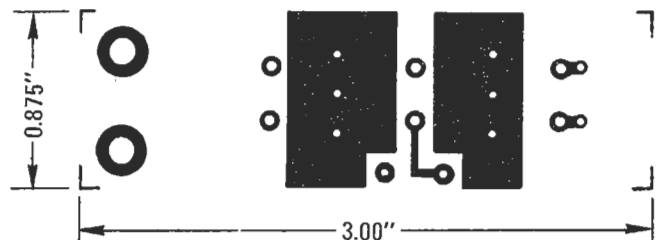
FOIL PATTERN of bottom of double-sided switch PC board shown actual size.
